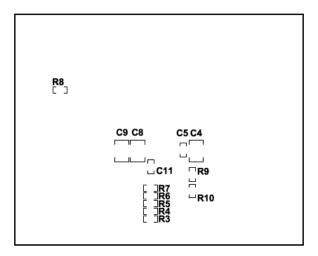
Bottom-Side Component Layout (Bottom View)
